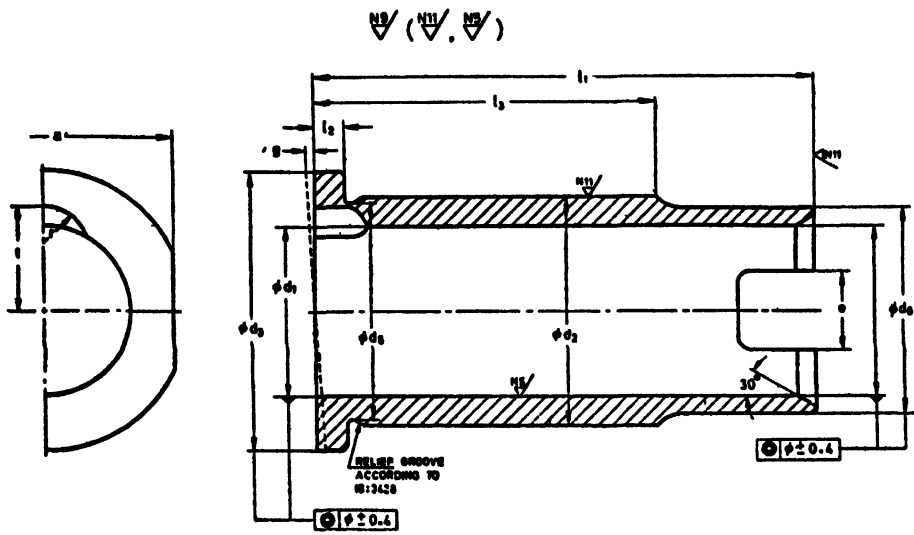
DIMENSIONS FOR DRY CYLINDER LINERS
